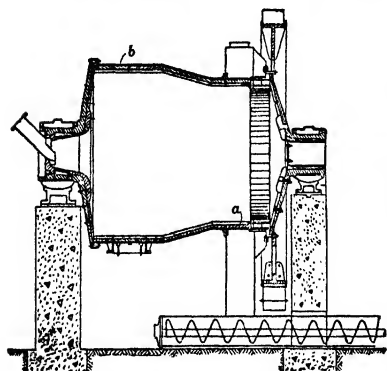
Dry-grinding ball mill (PRELIMINATOR).
